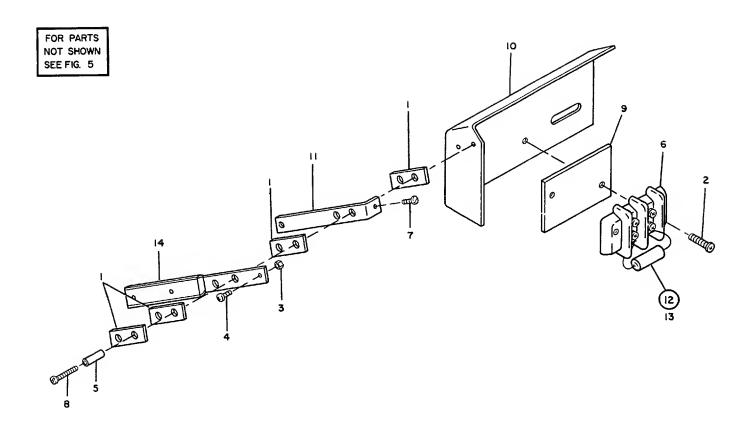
A. PACK-IN-PLACE SWITCH ASSEMBLY. SEE LIST 5A.
